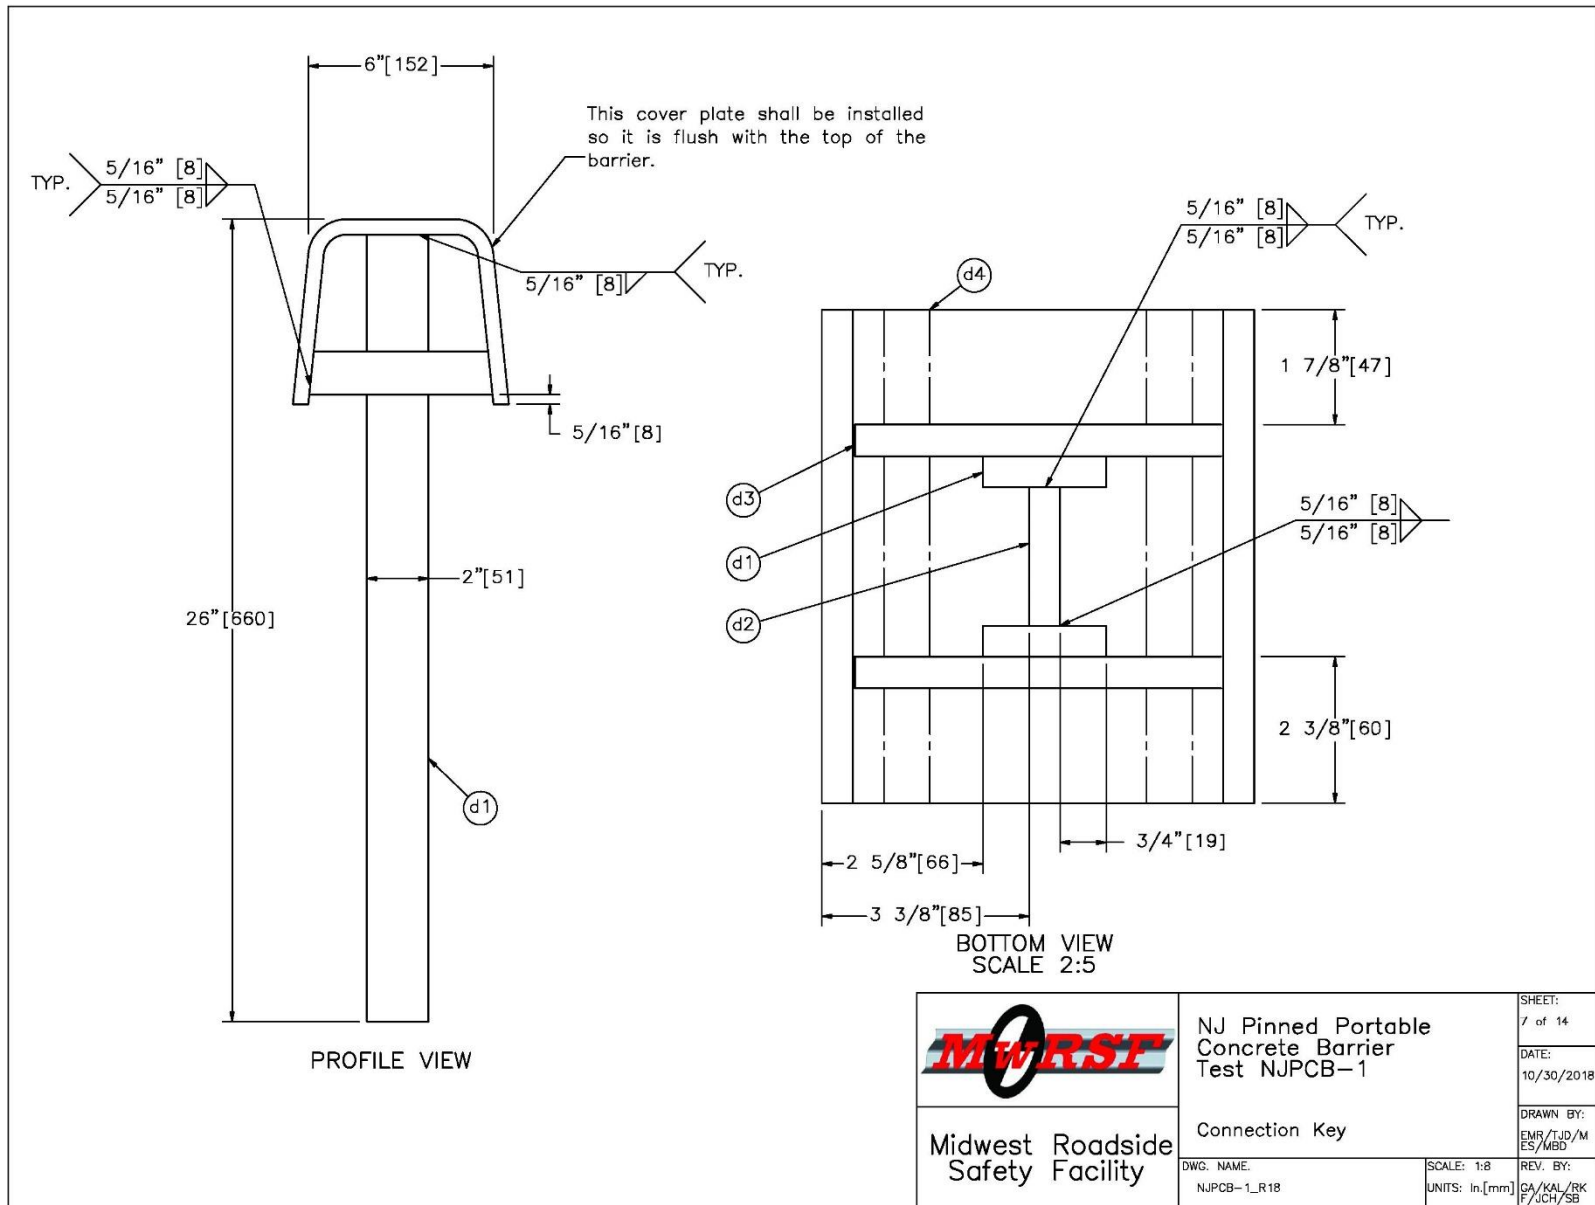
PCB Connection Key Assembly Details, Test No. NJPCB-1
